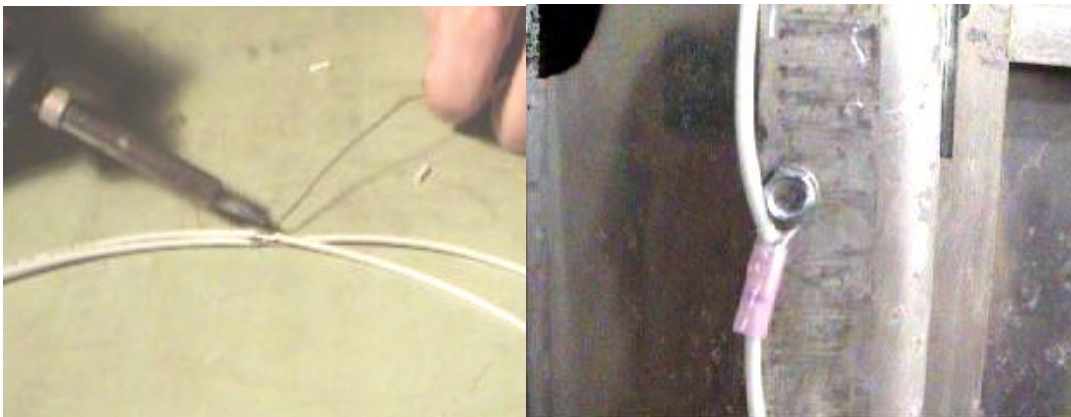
, Soldering of Two Ends of Wire Together to Varying Degrees of Contact.
